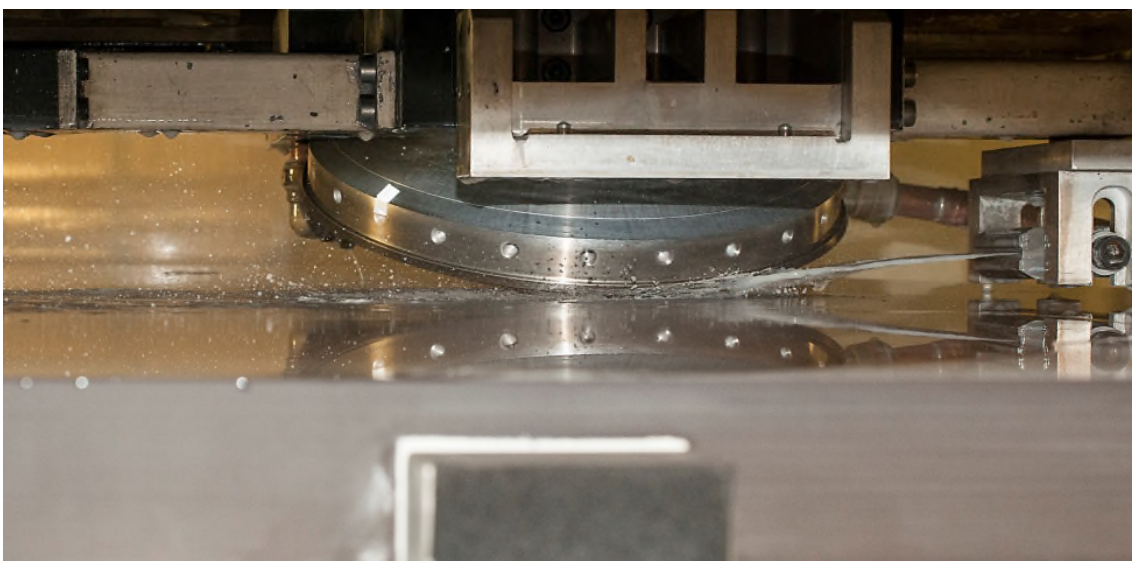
Machining ESO E-ELT segment on BoX (close-up)
